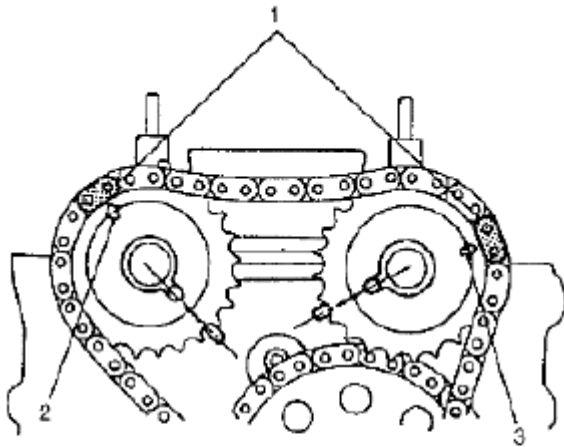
Identifying 2nd Timing Chain & Match Marks On Idler Sprocket
